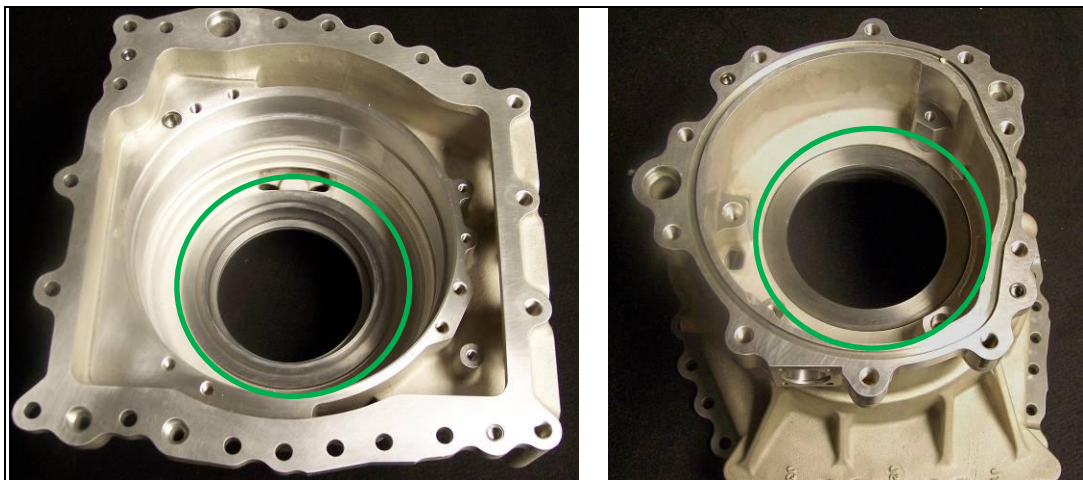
New magnesium component for the F-35 Joint Strike Fighter with pressed-in steel liner. Left: (top view) steel liner raised about the magnesium casting. Right: (bottom view) steel liner flush with the magnesium casting.
